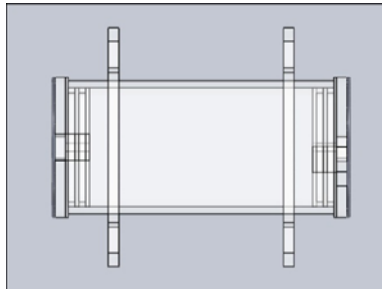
design tube buoyancy with solidwork (Rafsi,2015)
